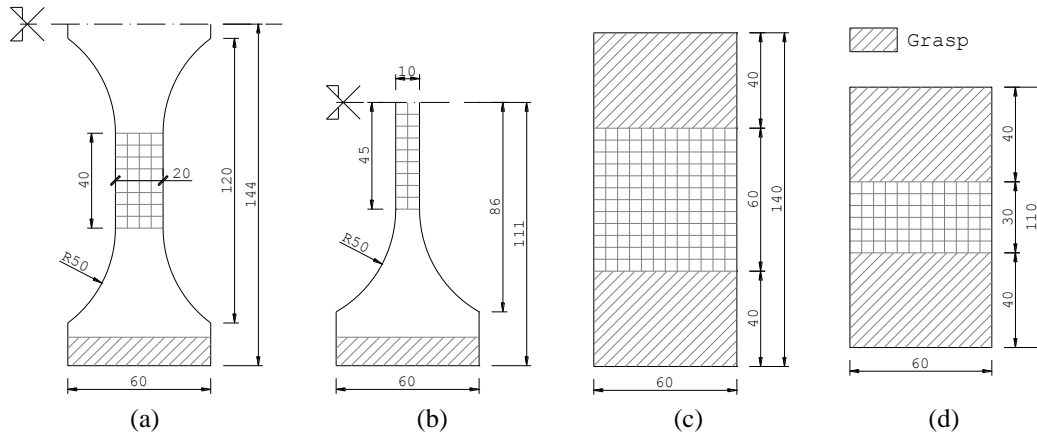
Shape and dimensions of samples in tensile tests. Lengths in mm.
